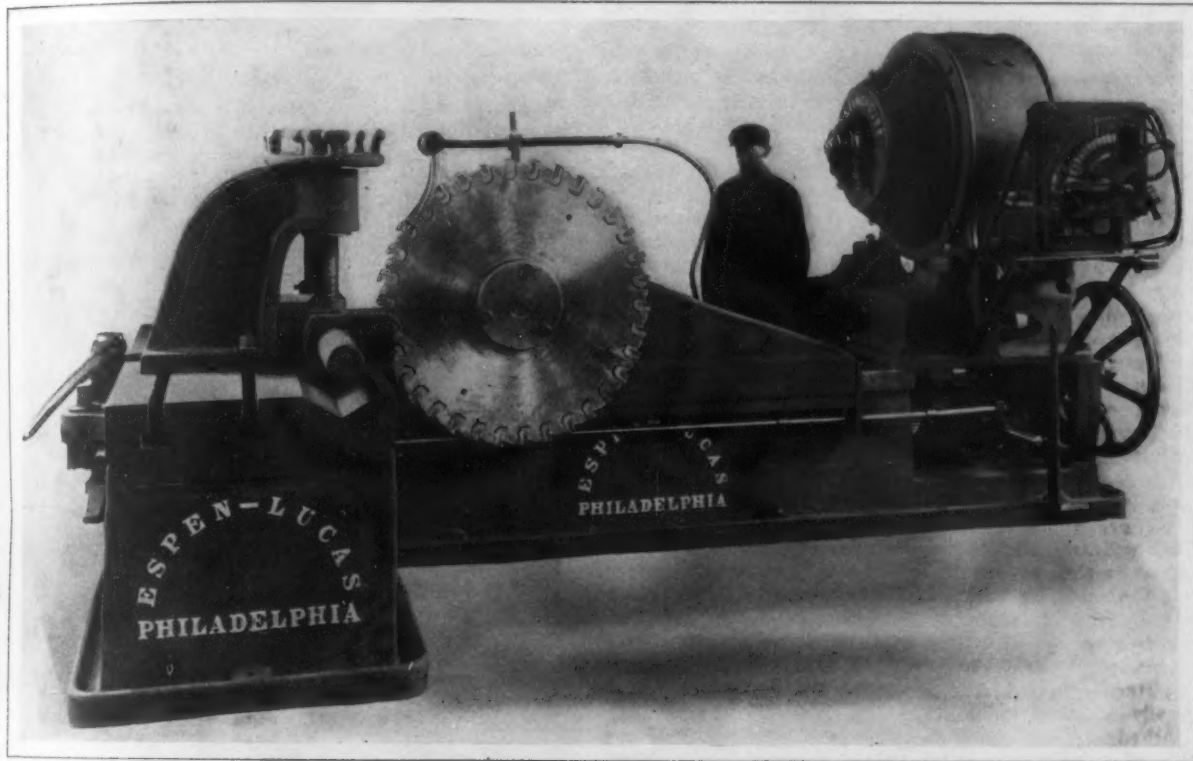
A Single-Blade Cold Saw Cutting-Off Machine Equipped with a Special Table for Rapid Shifting of the Work Developed by the Espen-Lucas Machine Works, Philadelphia, Pa.
